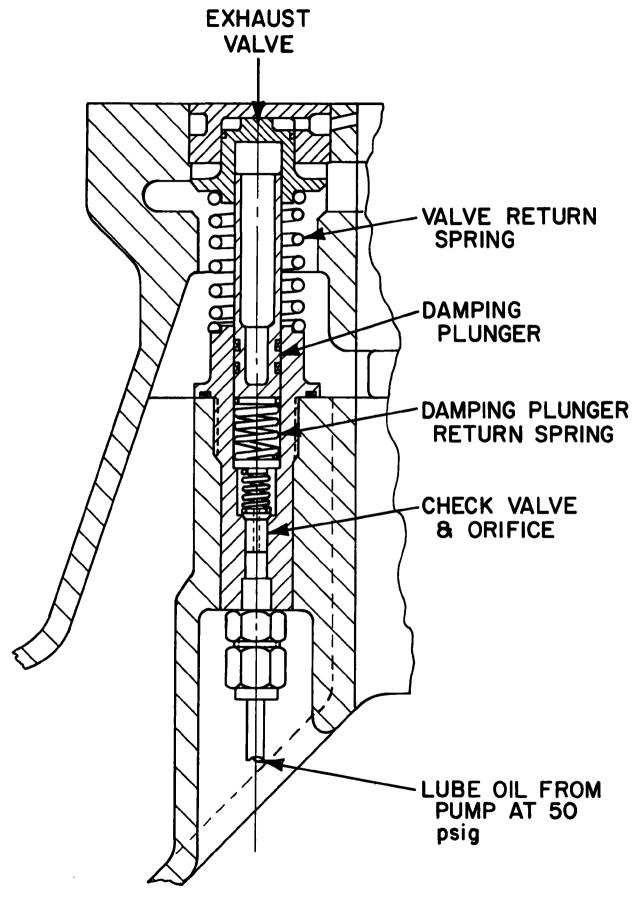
Exhaust Valve Design with Hydraulic Damper.
